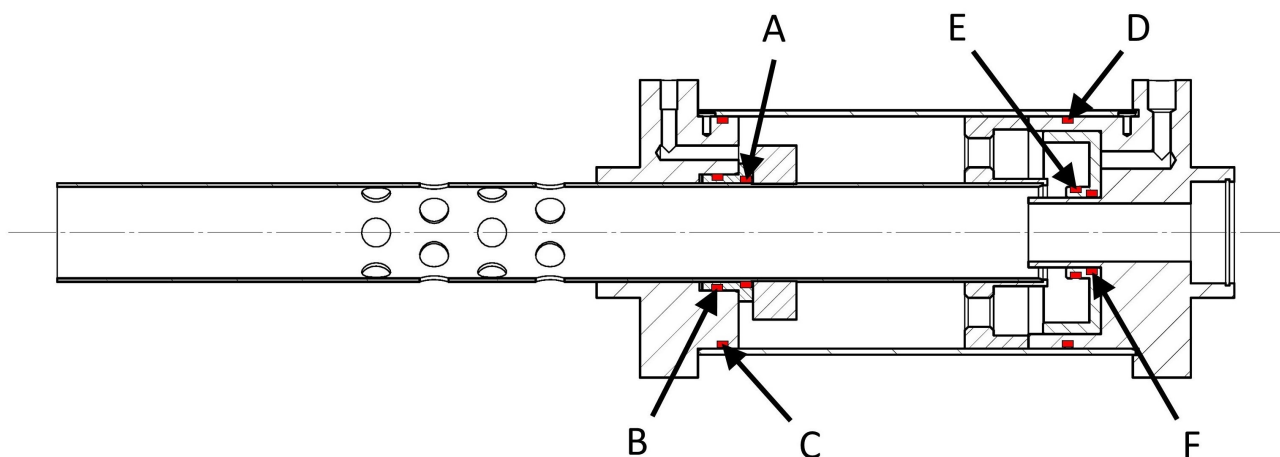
Cross section of the gas gun assembly showing O-rings locations
